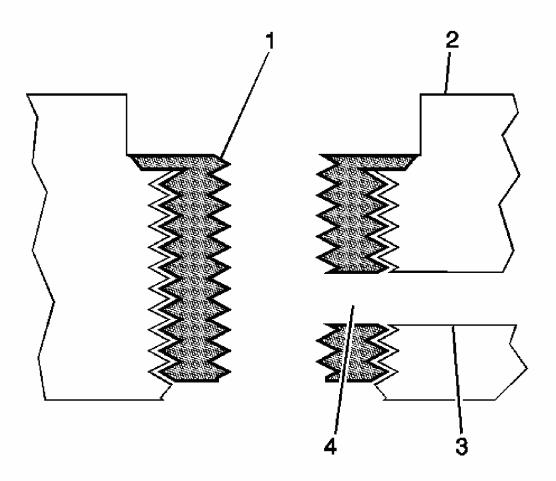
View Of Restricted Engine Coolant Passage - Recessed Thread Repair Courtesy of GENERAL MOTORS CORP.
